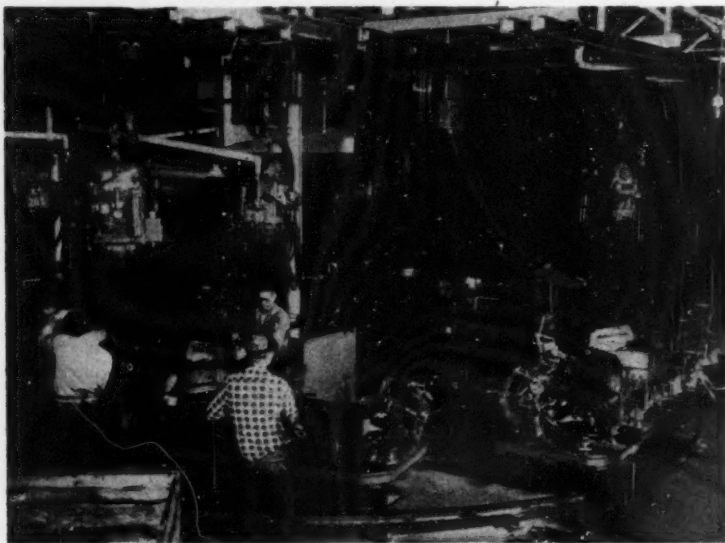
Roundabout Conveyor Equipped with Fixtures for Joining the Under-body, Floor Pan, and Front End by Means of 1,350 Spot-welds
